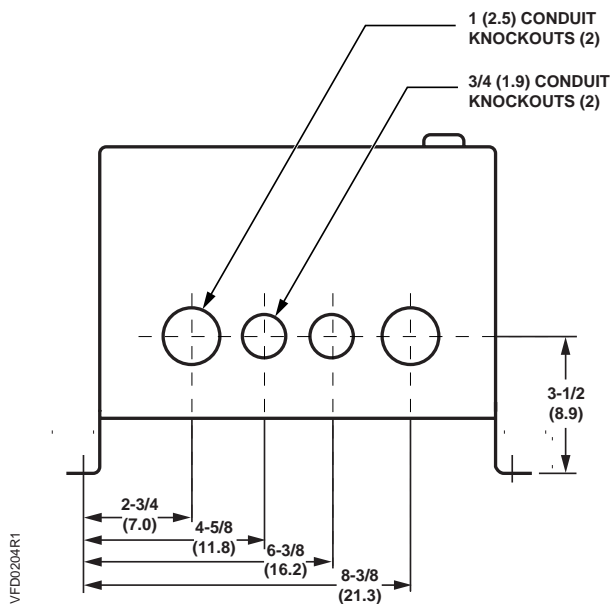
Mounting and Overall Dimensions in Inches (Centimeters).
